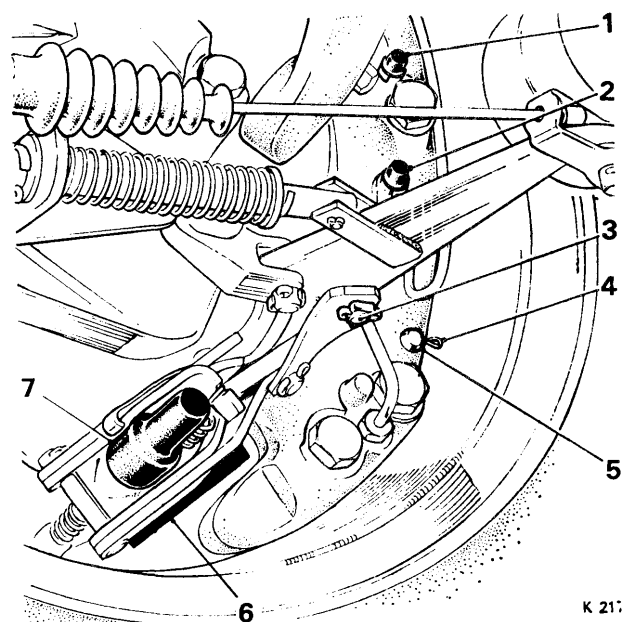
REAR BRAKE CALIPERS (LATE CARS)
